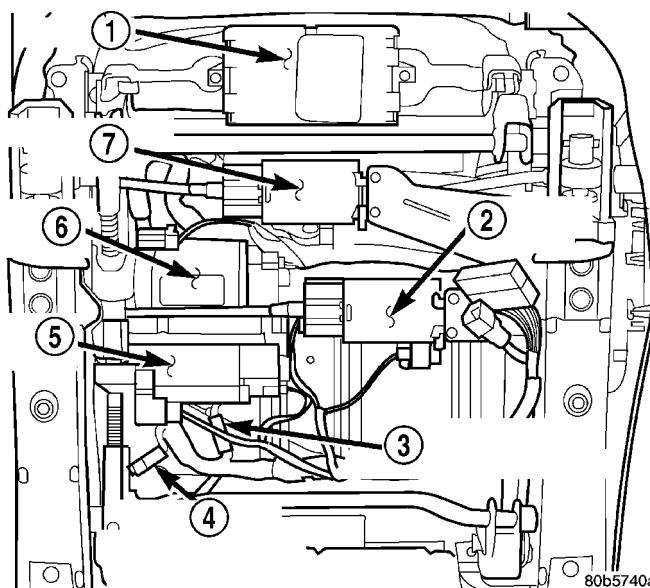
Memory Heated Seat/Mirror Module (MHSMM) Location
